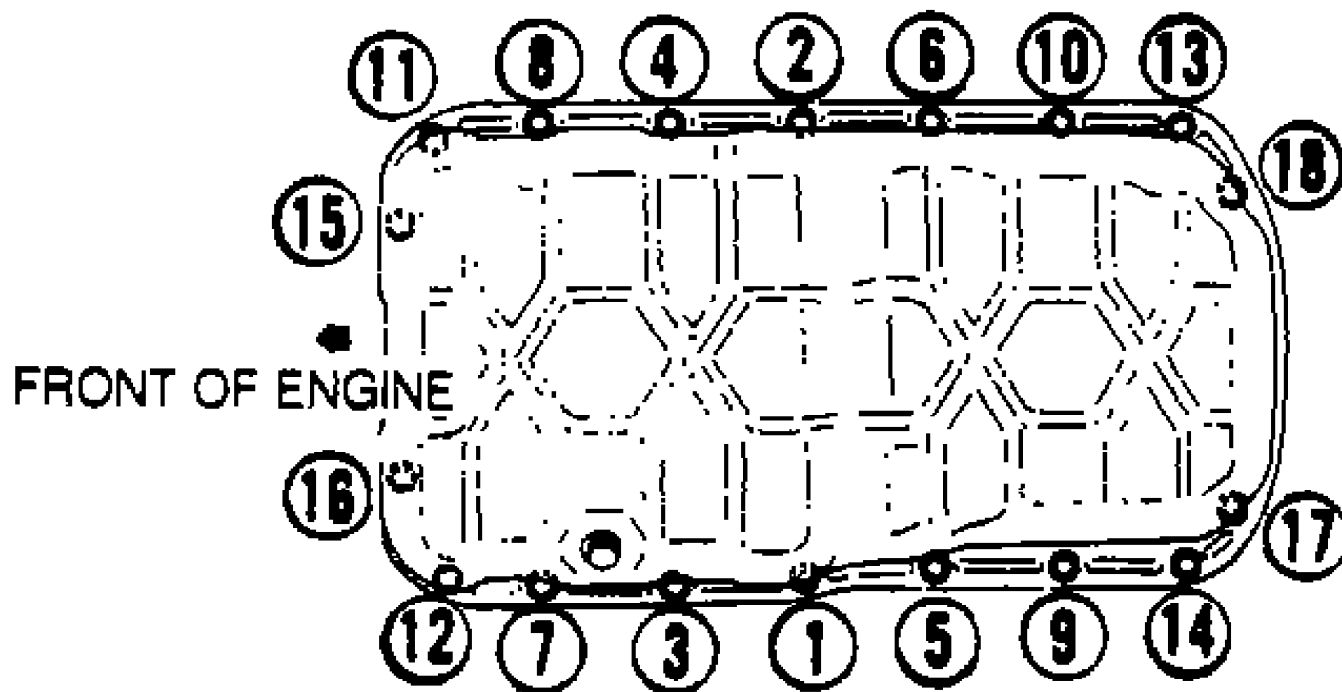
Tightening Oil Pan Bolts in Sequence
